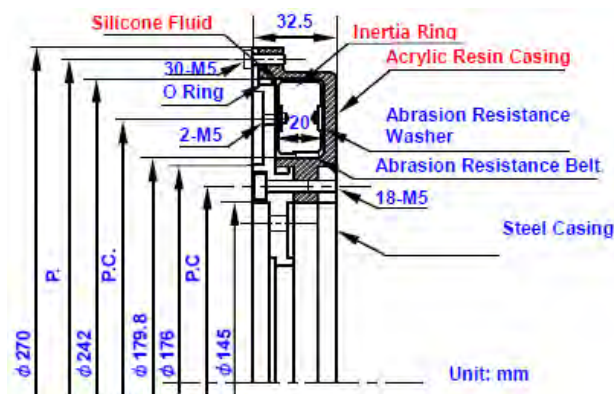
Shape and Dimensions of the Test Viscous Friction Dampers
